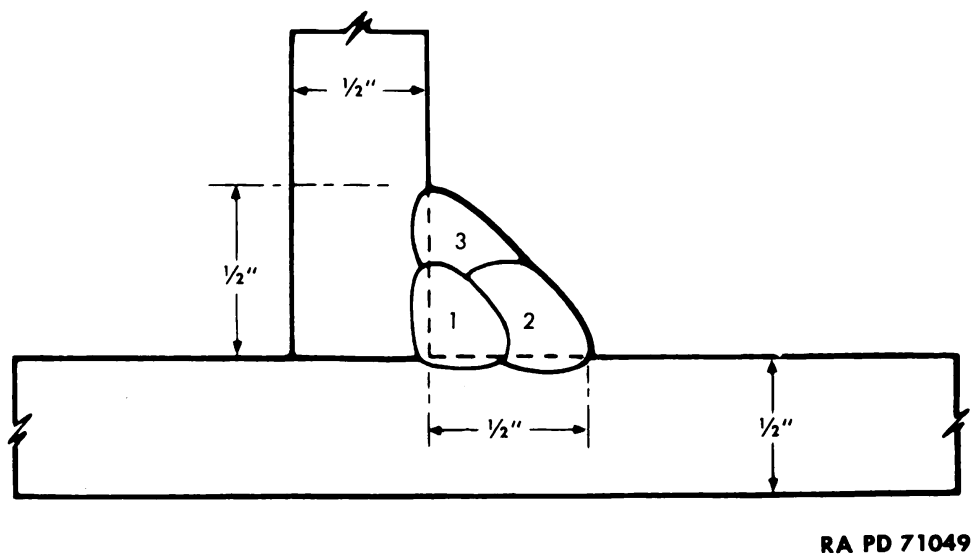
Fillet-welded T-joints on Heavy Plate
